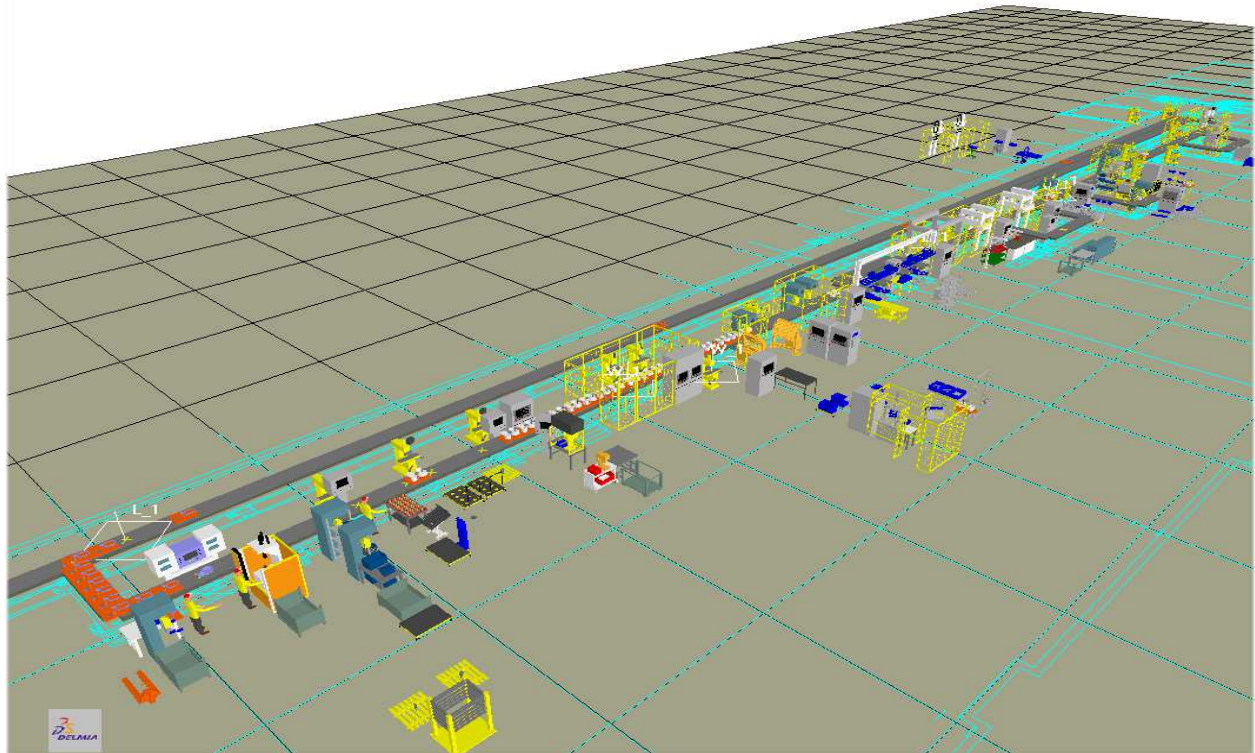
VW Slovakia – FMU of Gearbox Assembly Line (Gregor,M.&Medvecký,S.,2010)
